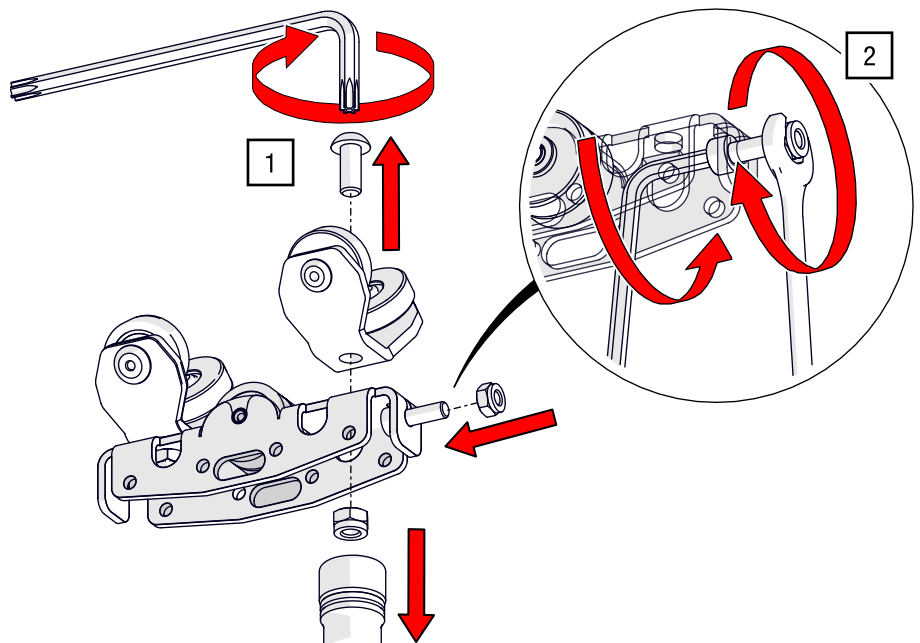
OFFICE master runner overlap arm – Mounting the screw for magnetic coupling
